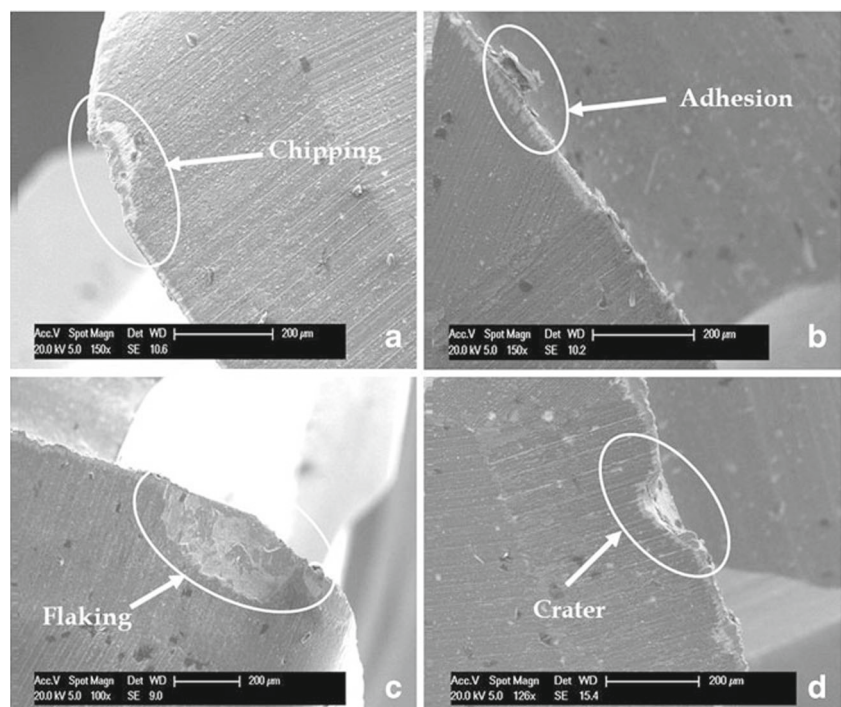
Initial wear of the bottom cutting edge zone after machining three holes (cutting time 2.5 min)
